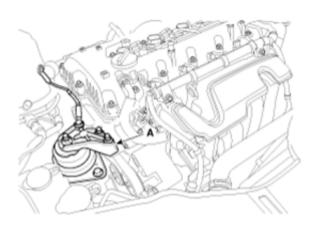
Identifying Engine Mounting Bracket Courtesy of KIA MOTORS AMERICA, INC.
